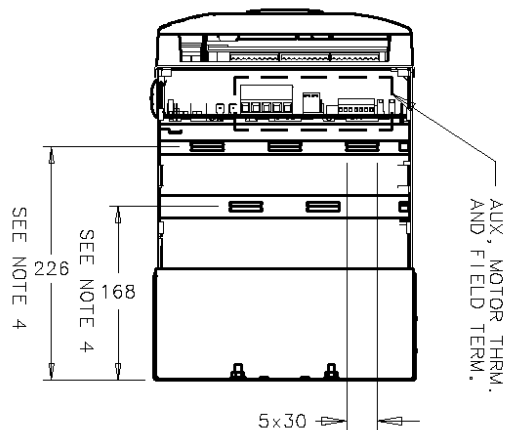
Frame 4 : 380-830A Stack Assembly – Drg. No. HG466700U001
